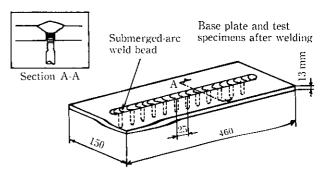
Welding procedure of reheat cracking test (Implant test, AMAX¹⁾)
